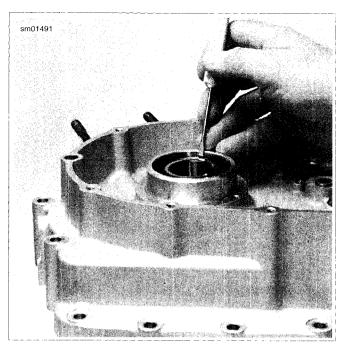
Removing Left Main Oil Seal Retaining Ring
